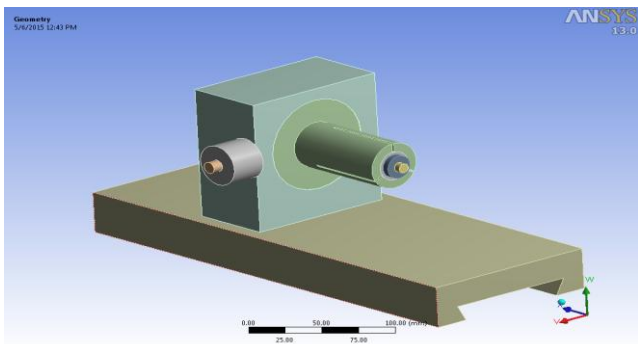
Shows 3D view of Conical wedge machining fixture.
